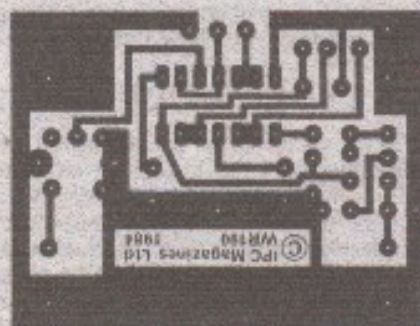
The track pattern and component layout of the new switching board, shown full size
